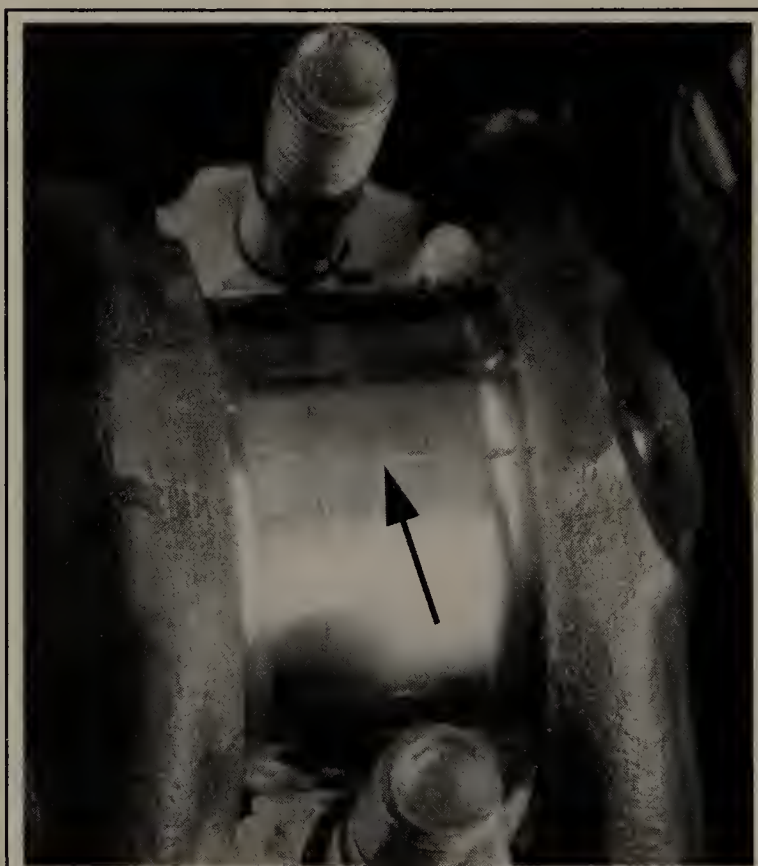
Apply a strip of gauging material to the bearing journal, then install and torque the cap
